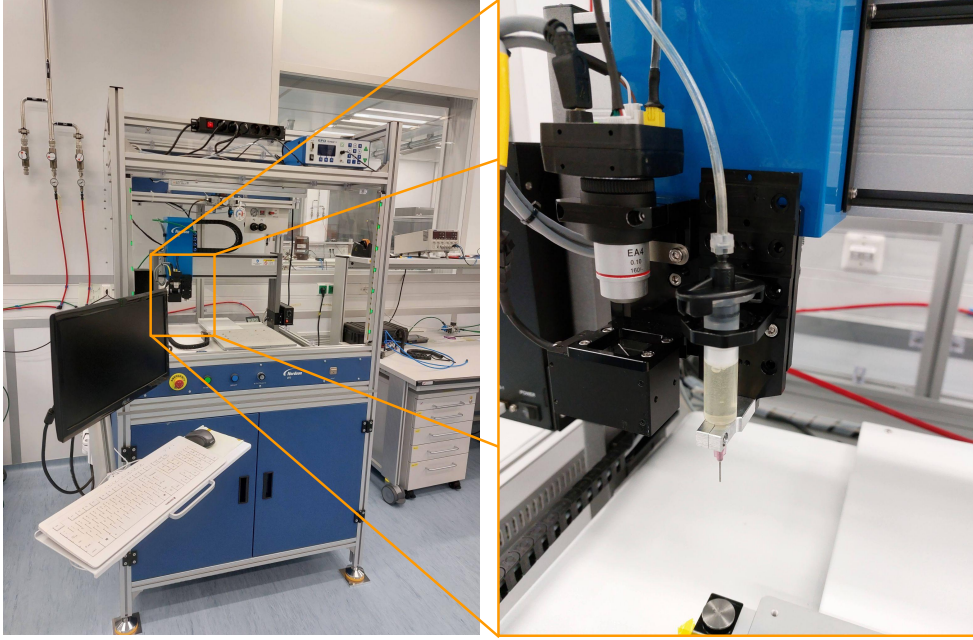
The glue dispensing robot (left) and a close-up view showing the position of a syringe filled with glue (right).
